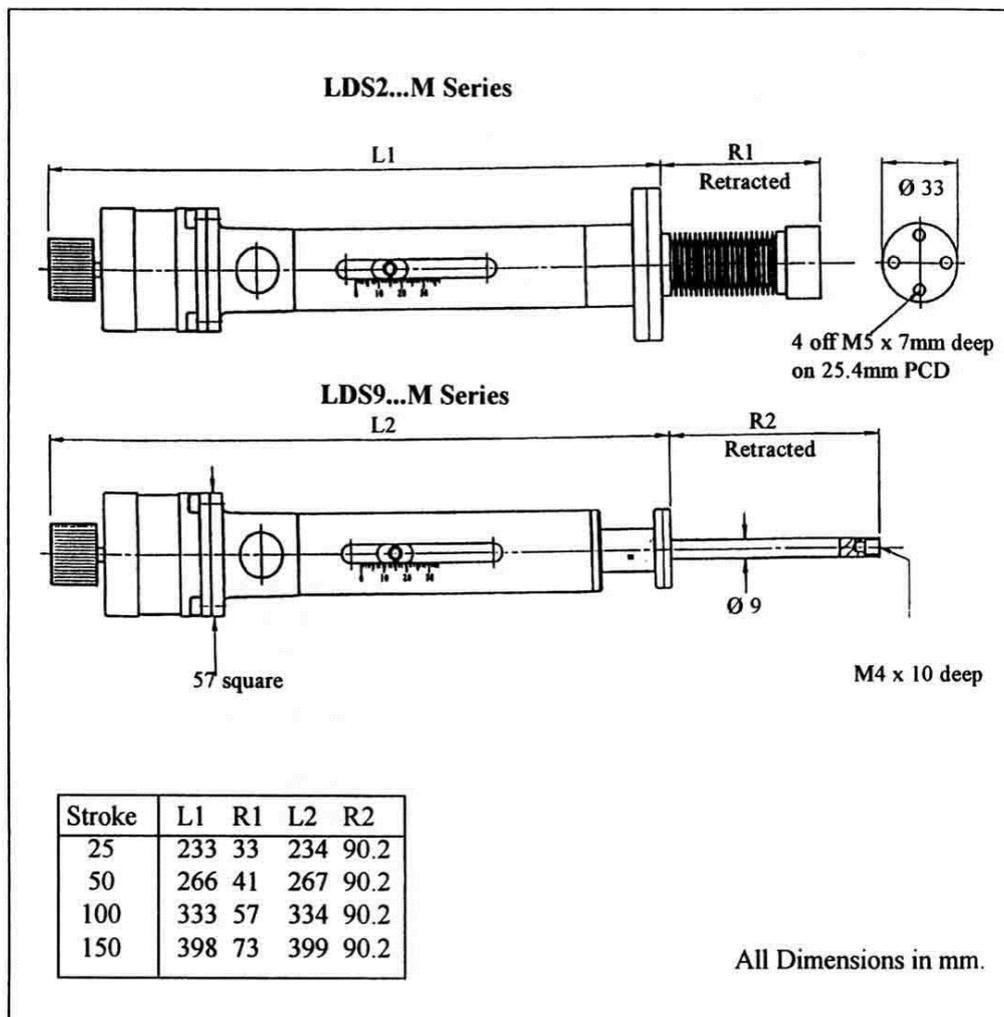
LDS2...M and LDS9...M Motor Driven Linear Motion Drives
